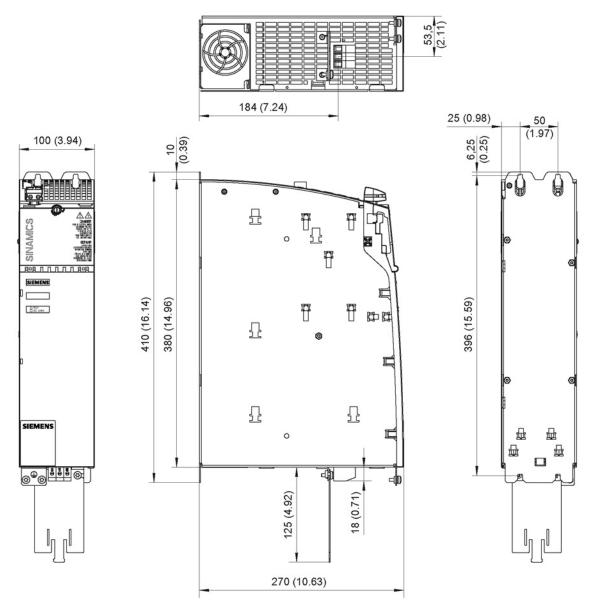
Dimension drawing of 16 kW Active Line Module with internal air cooling, all dimensions in mm and (inches)
